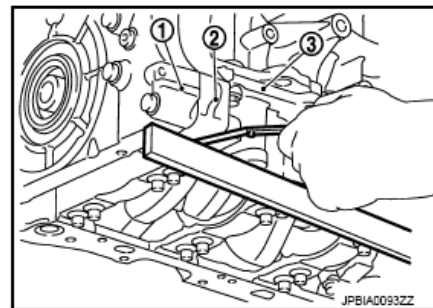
Checking Surface Height Difference Between Rear Timing Chain Case To Lower Cylinder Block Using Feeler Gauge
